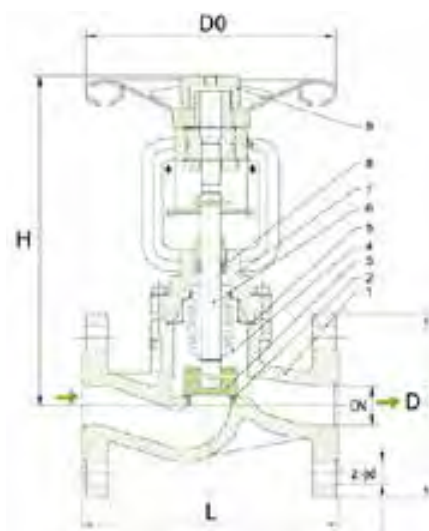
Bellows Sealed Globe Valve (Flanged)
